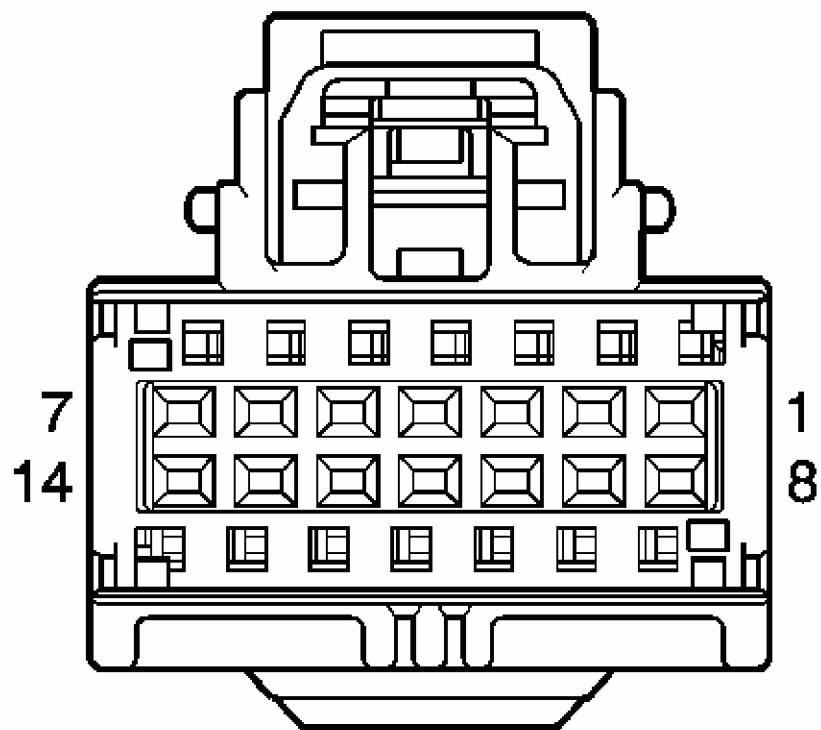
Front Passenger Door Module (FPDM) C4 (KA1/KB6) Connector End View
